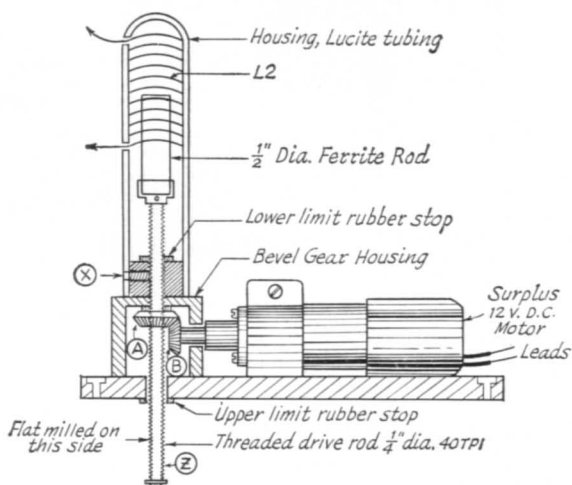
The remote variable-inductor assembly. The threaded drive rod, Z, has a flat milled its full length and is prevented from rotating by means of a nylon set screw at X. The hole in bevel gear A is tapped for  $\frac{1}{4}$ -40 threads per inch and mates with the drive rod, Z. Energizing the motor drives bevel gear B, which in turn drives the "captured nut" bevel gear A, raising or lowering the ferrite rod inside  $L_2$ .
